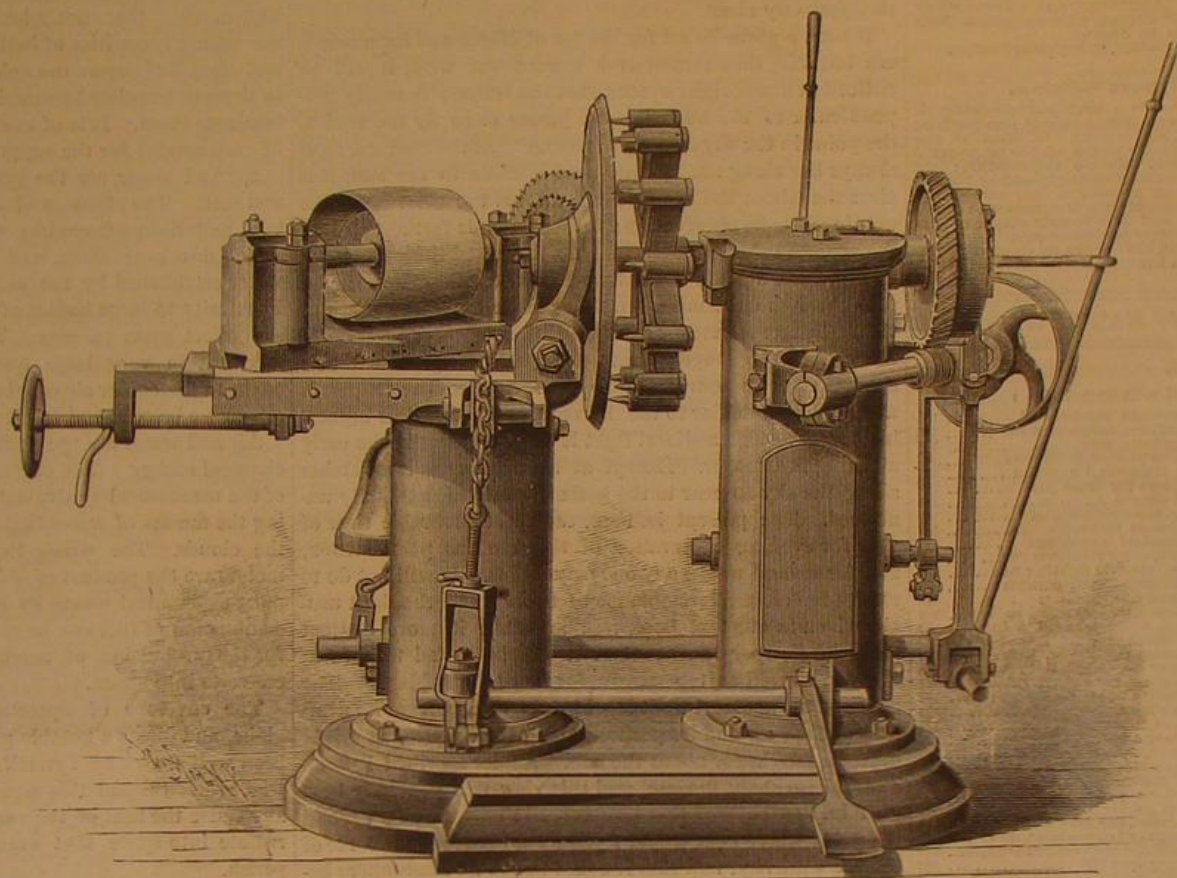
MACHINE FOR ROUNDING HEADS.
